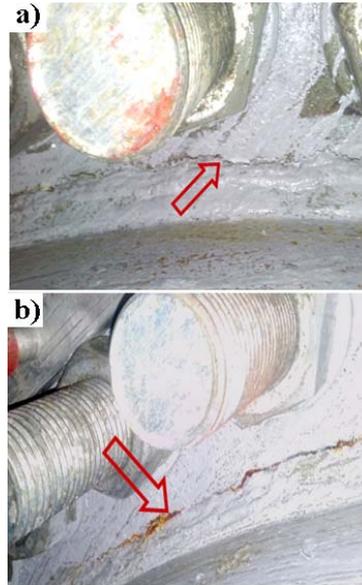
Crack formation in pipe-flange welding zones
